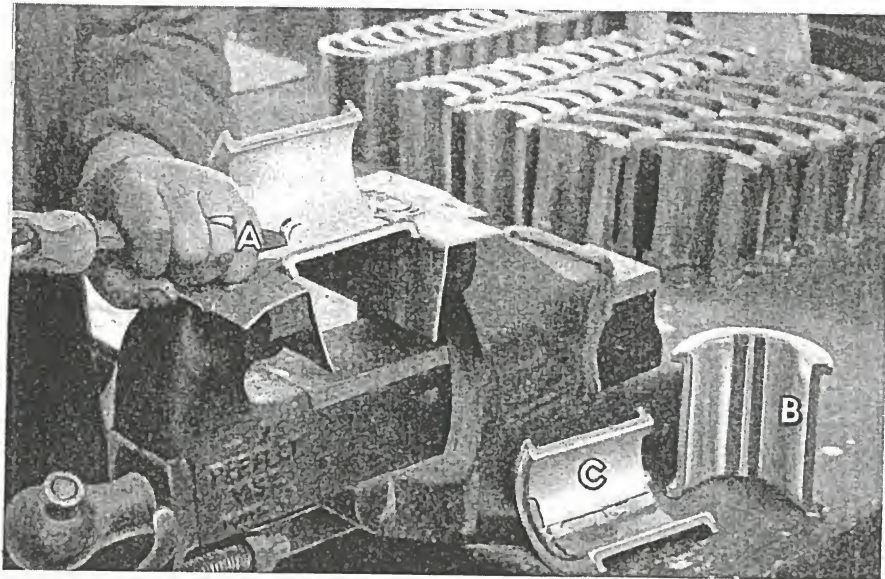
PLATE Vc. CHIPPING TEST ON A FINISHED BEARING
